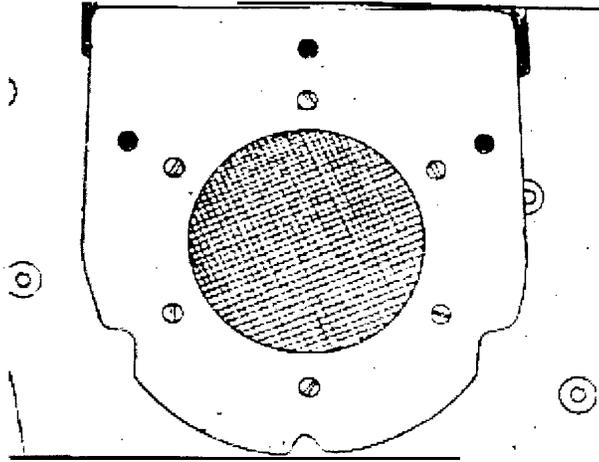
Joint in the Intake Flame Arrester Housing.
